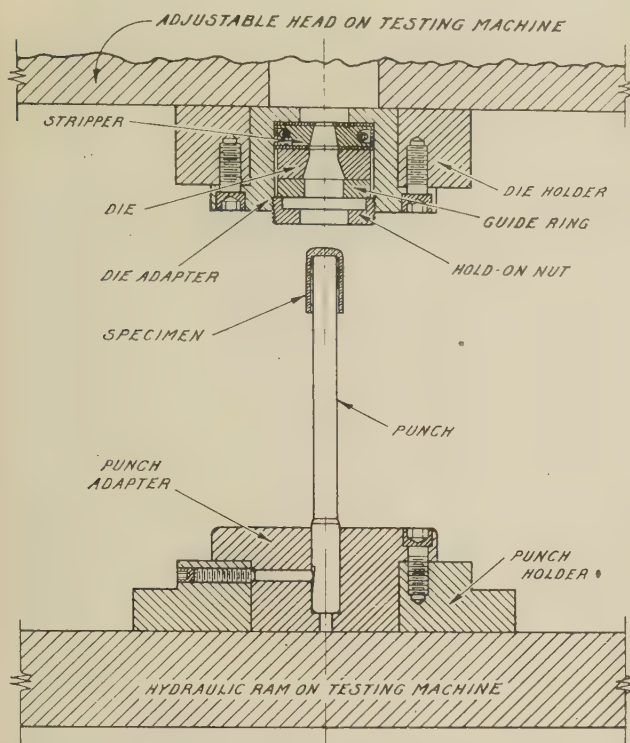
EXPERIMENTAL DIE SETUP FOR DRAWING OR IRONING OF TUBULAR SPECIMENS
